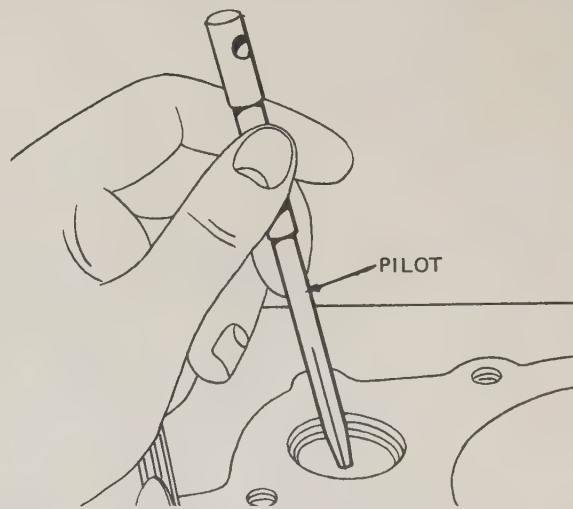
Inserting pilot in preparation for counterboring for a valve-seat insert. (Briggs & Stratton Corporation)
